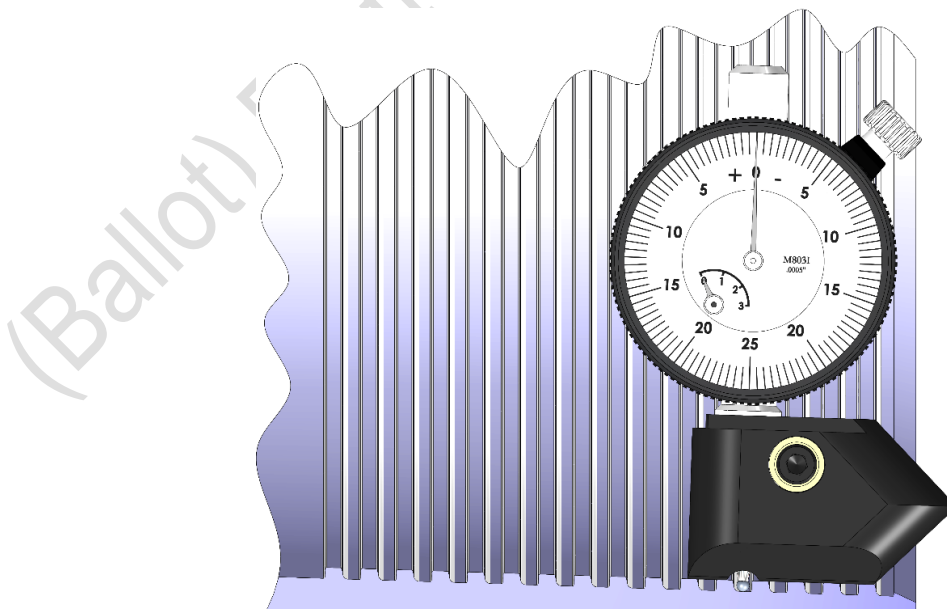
Internal Thread Height Gauge on Coupling Threads (Buttress Thread Height Gauge)
